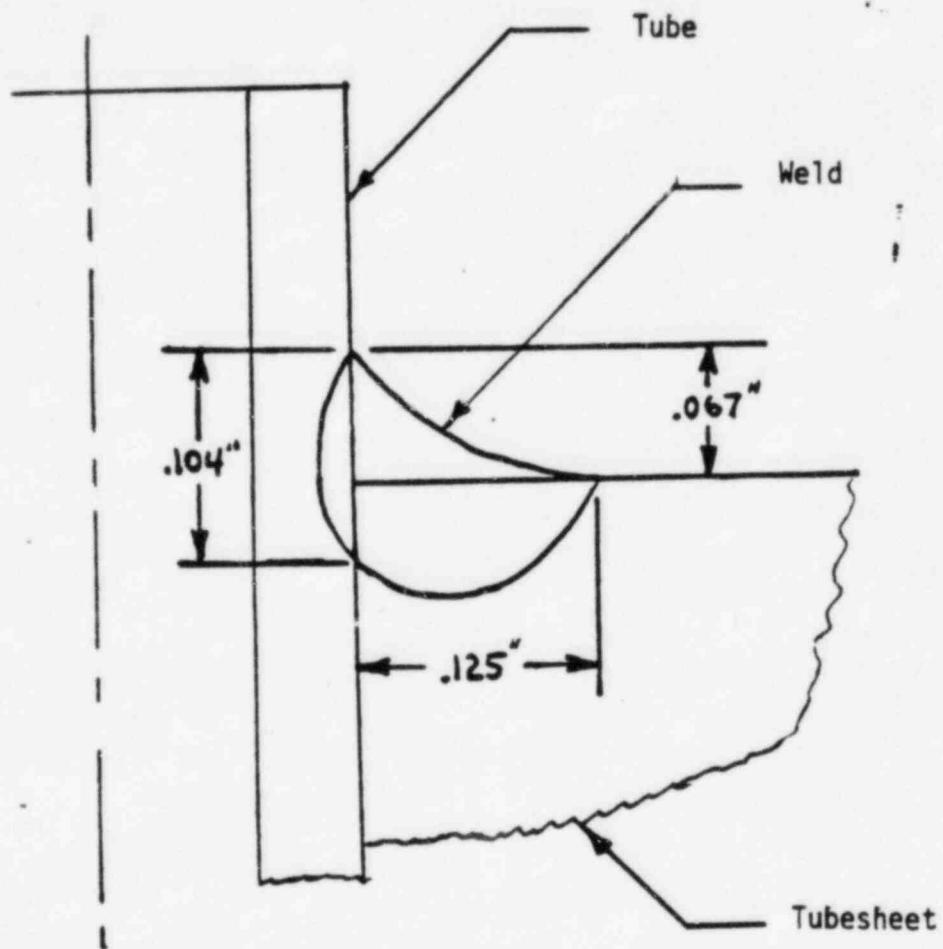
Tube-To-Tubesheet Weld Geometry
